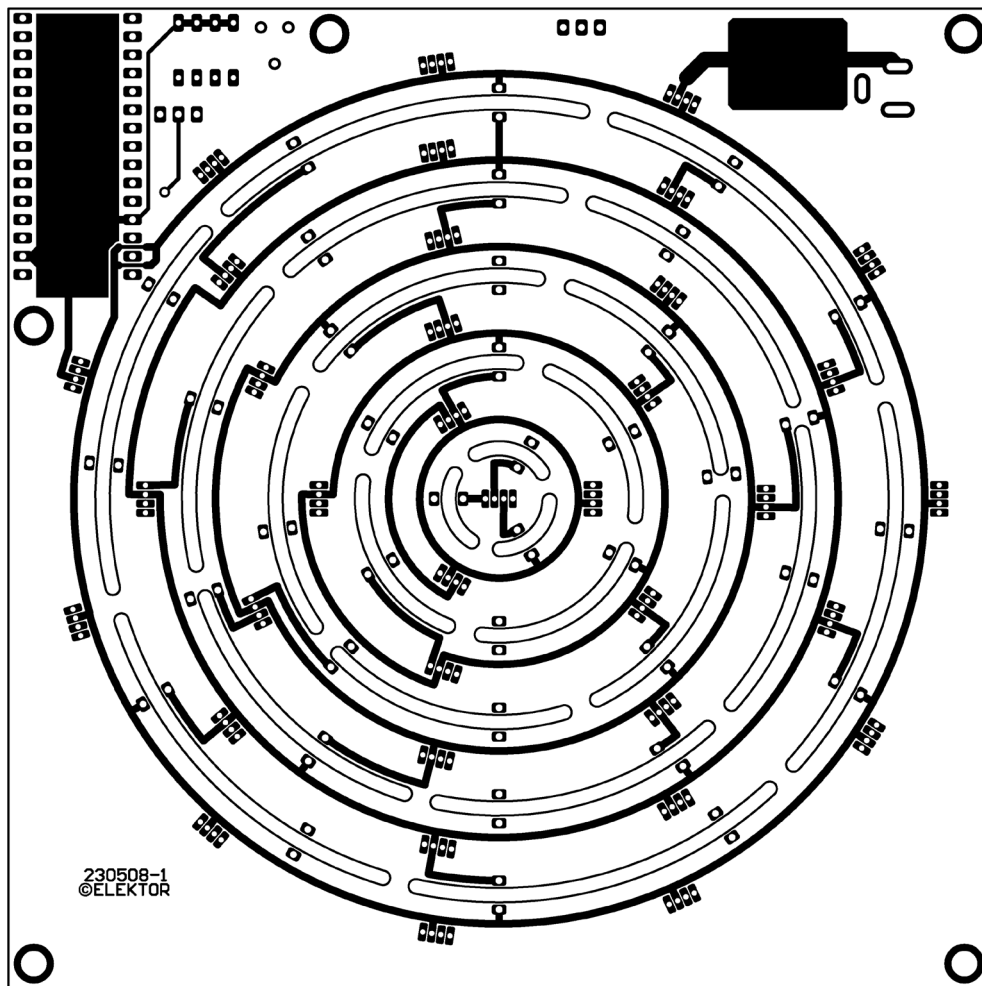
Copper layout, PCB top side, Circular Christmas Tree 2023. PCB no. 230508-1 v1.1.
